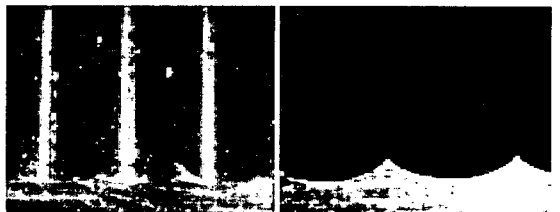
Machining result of cutting speed 900 mm/min (Ni)
